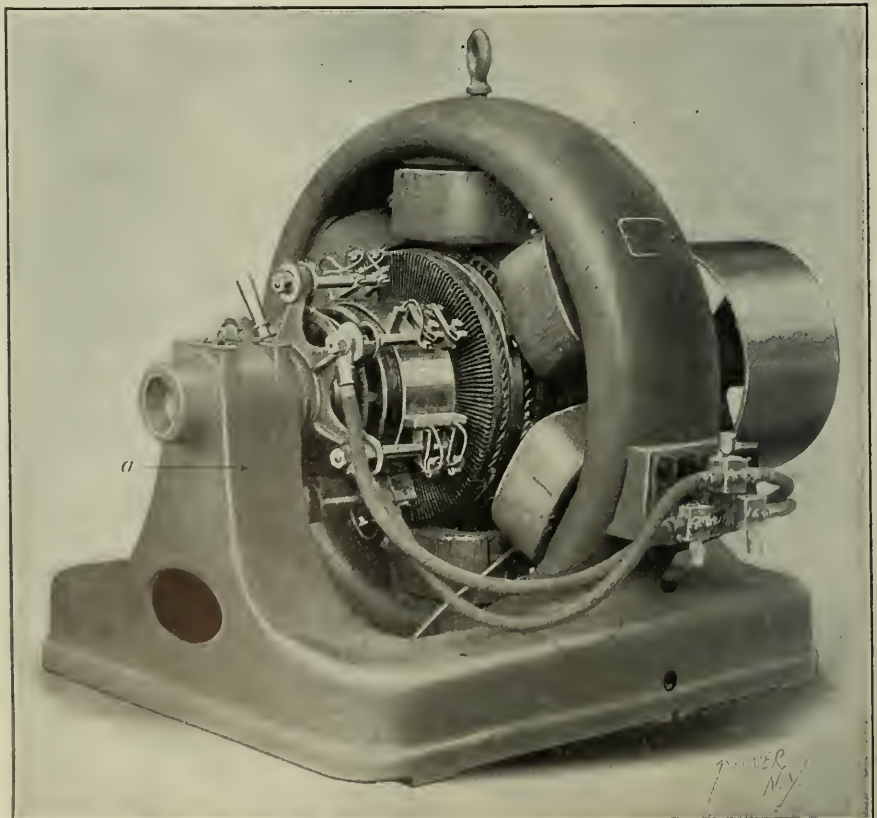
FORT WAYNE BELTED MULTIPOLAR GENERATOR, WITH POLE PIECES CAST IN WITH THE FIELD FRAME
